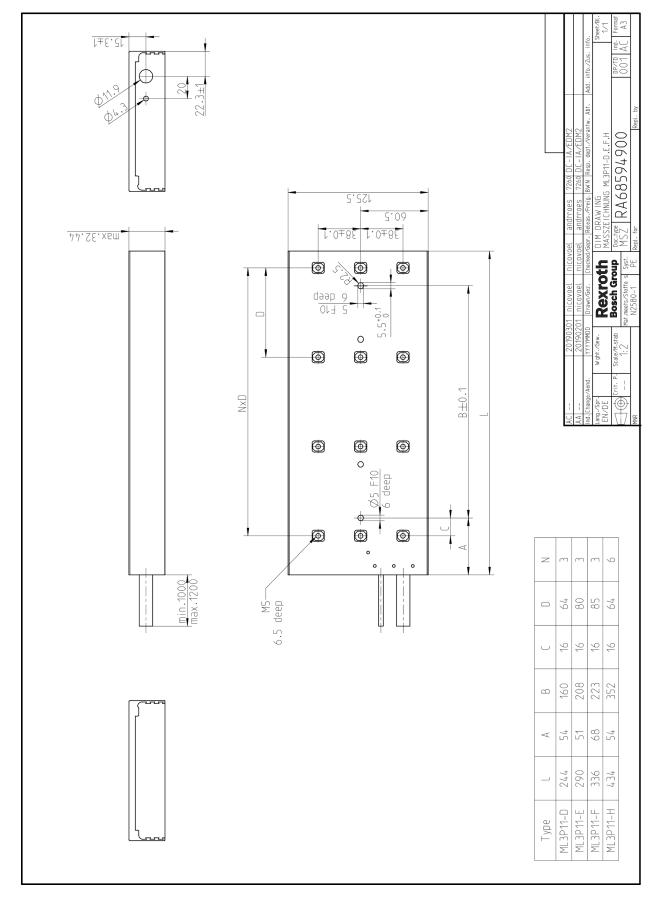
Dimension sheet primary part ML3P11, frame lengths D, E, F, H Bosch Rexroth AG
